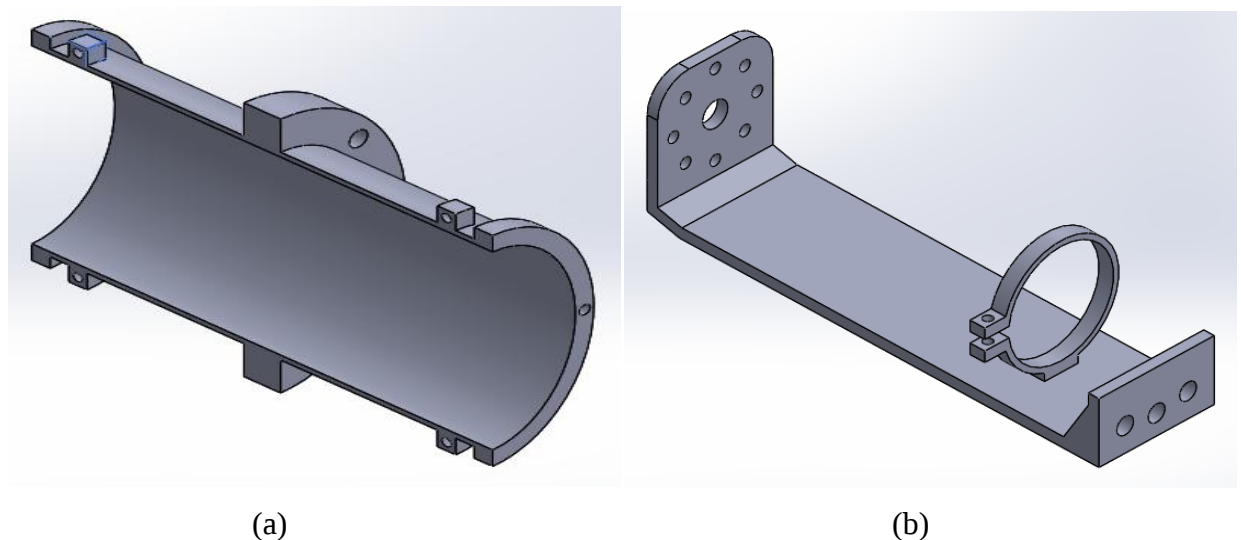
(a) Gearbox casing (b) Motor mounting
